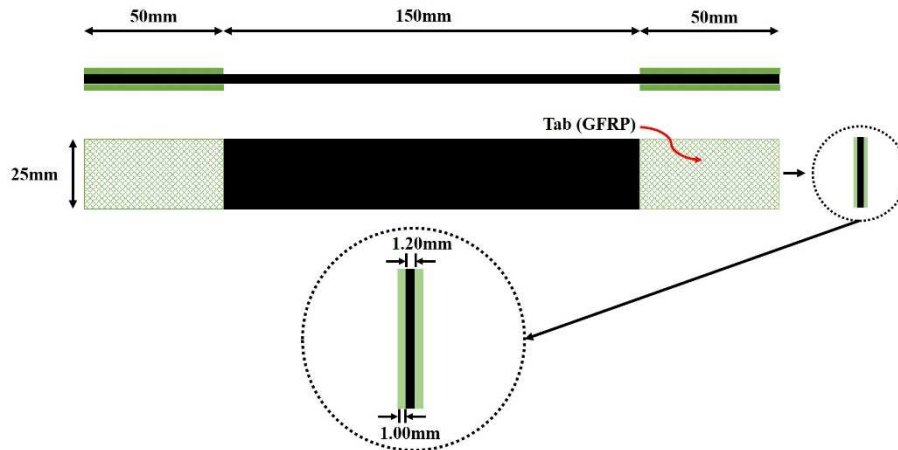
Dimensions of cross-ply specimens used for the tensile and fatigue tests
